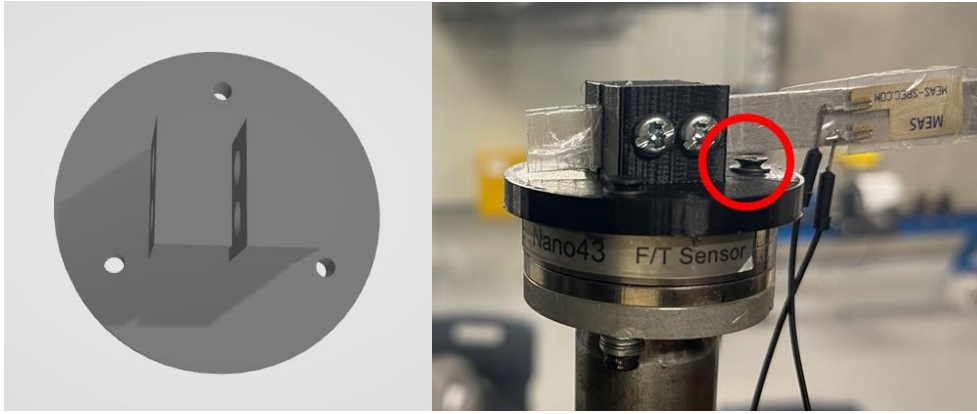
A Mounting Interface Plate for Connecting Transducer and Cantilever Beam.
